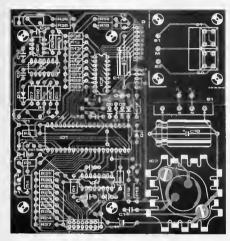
Construction of the electronics part of the printer becomes fairly simple on this PC board.
